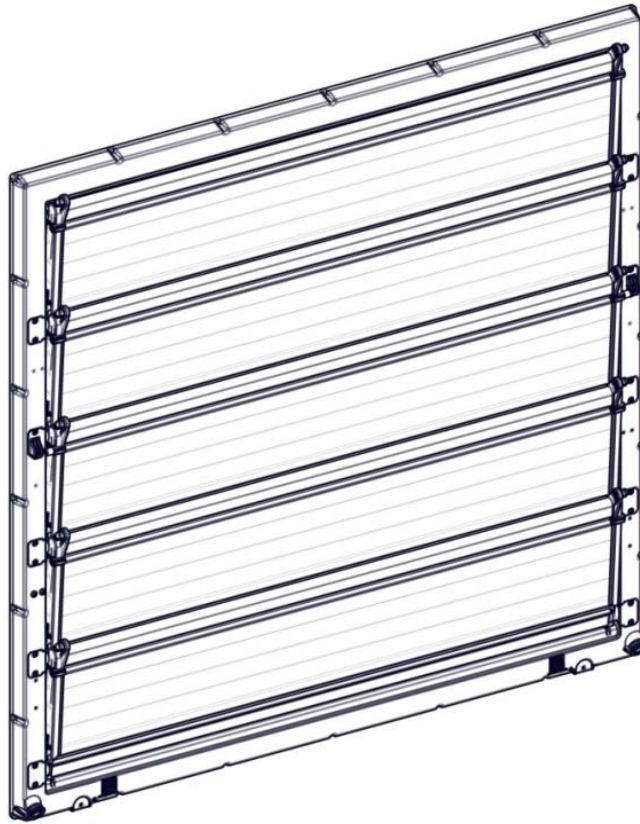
Overview drawing of DA17K tunnel inlet without assembly parts
